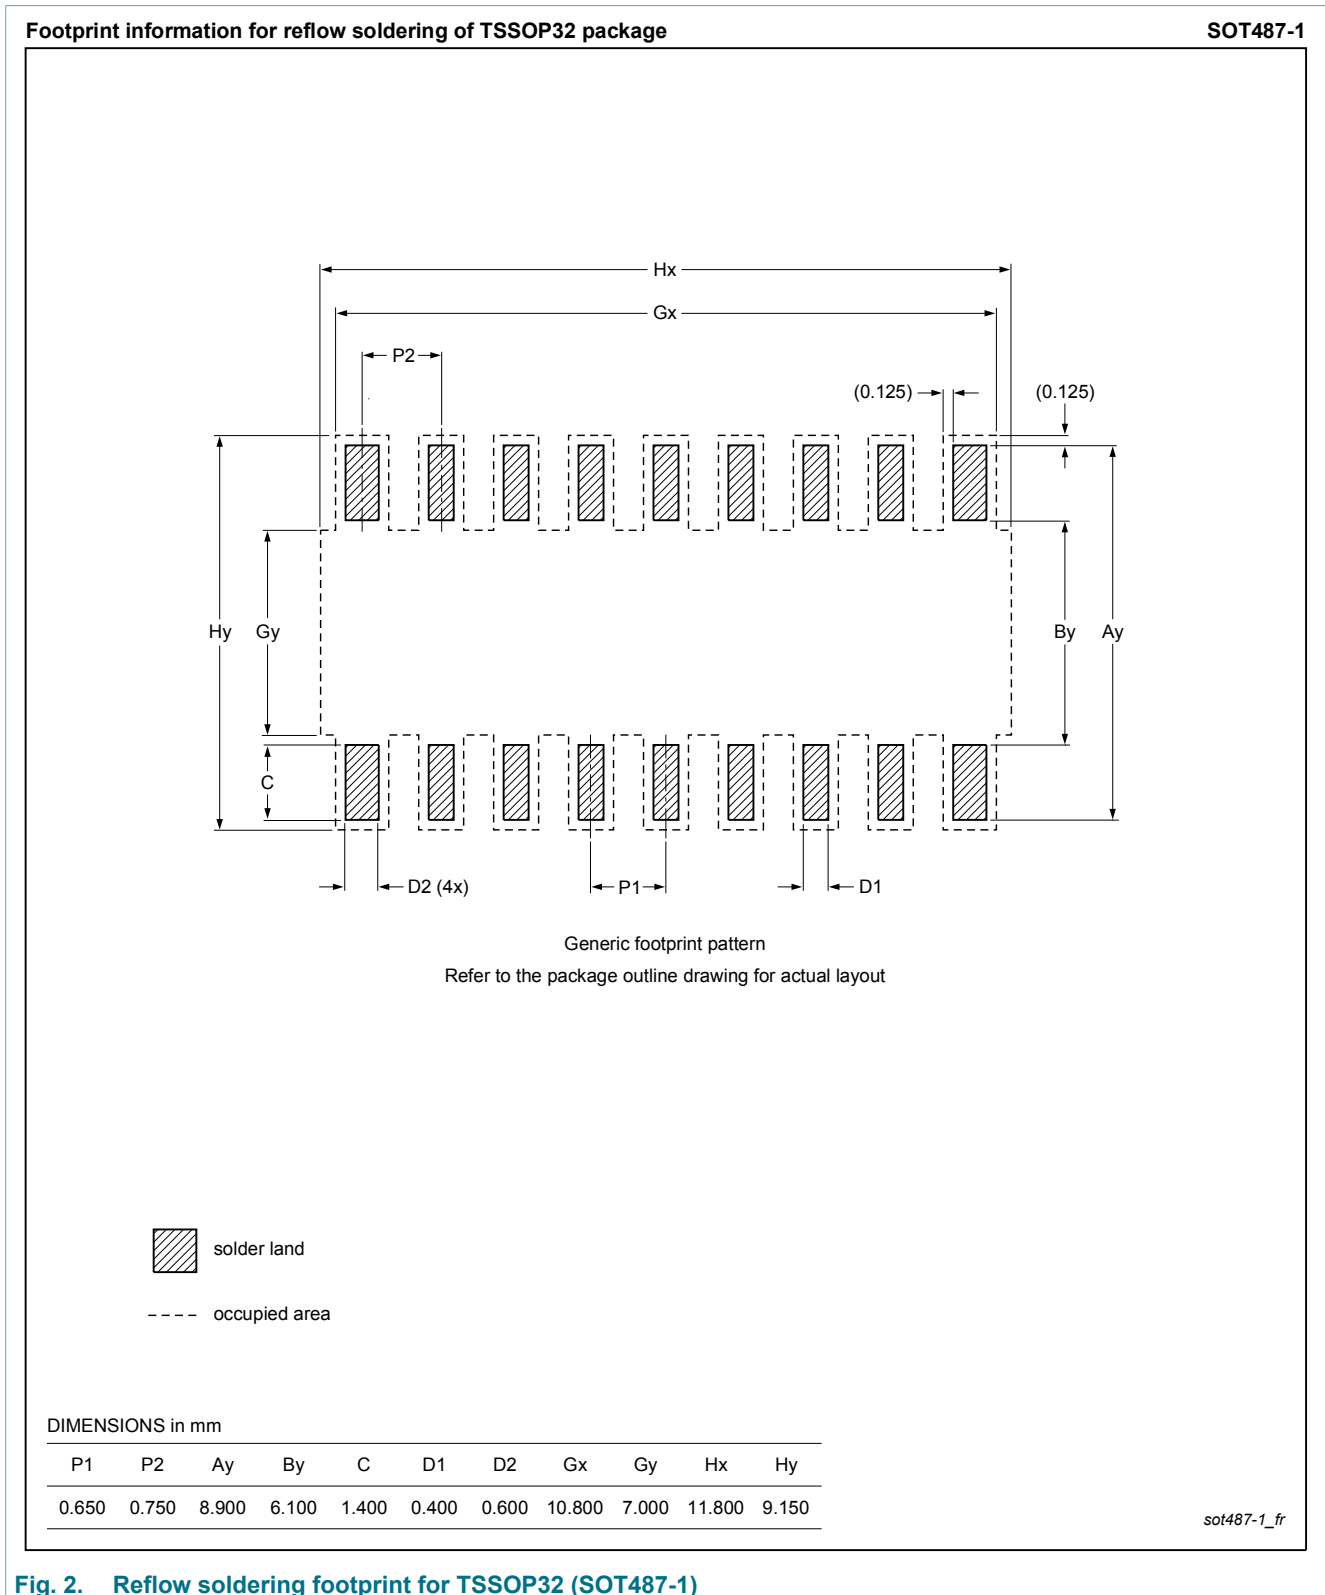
Reflow soldering footprint for TSSOP32 (SOT487-1)
